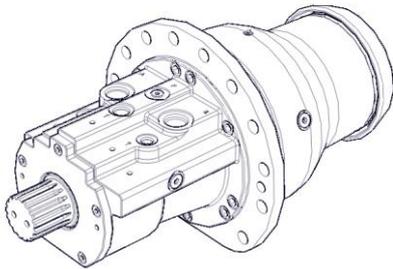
Radial Drive Motor with Inboard Drive Shaft
